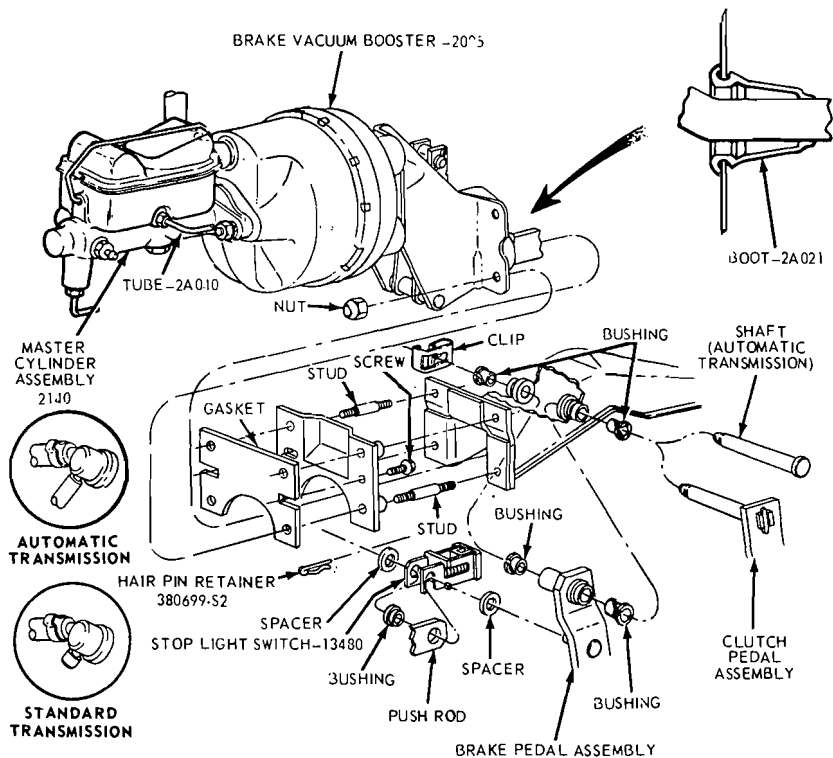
Master Cylinder Installation—Power Brake—Fairlane, Montego
